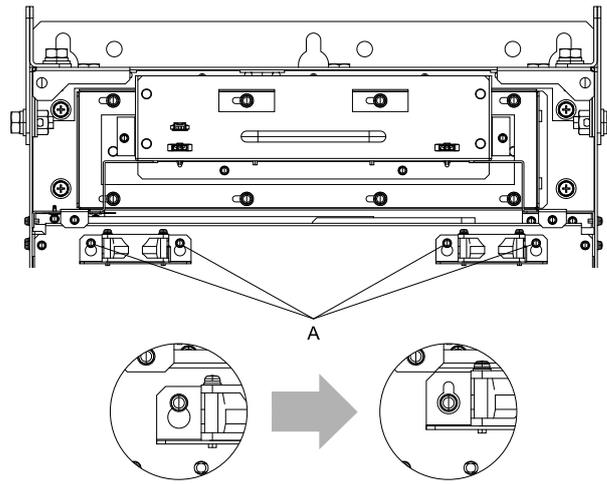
Slide the Circuit Board Cooling Fan Unit
